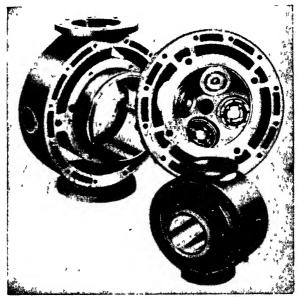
Cylinder constructed with removable liner. (Courtesy of Sullivan Machinery Co.)
